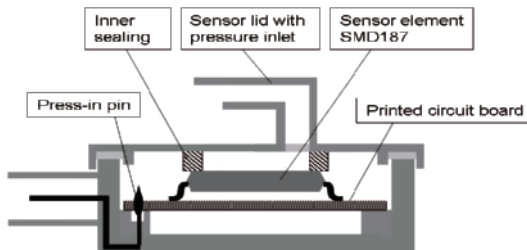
Schematic diagram of the structure of the airbag pressure sensor: the electronic components are mounted on the circuit board using standard reflow soldering and the circuit board is then pressed into the housing to provide mechanical and electrical connections. The housing is sealed by a laser-welded cover.
